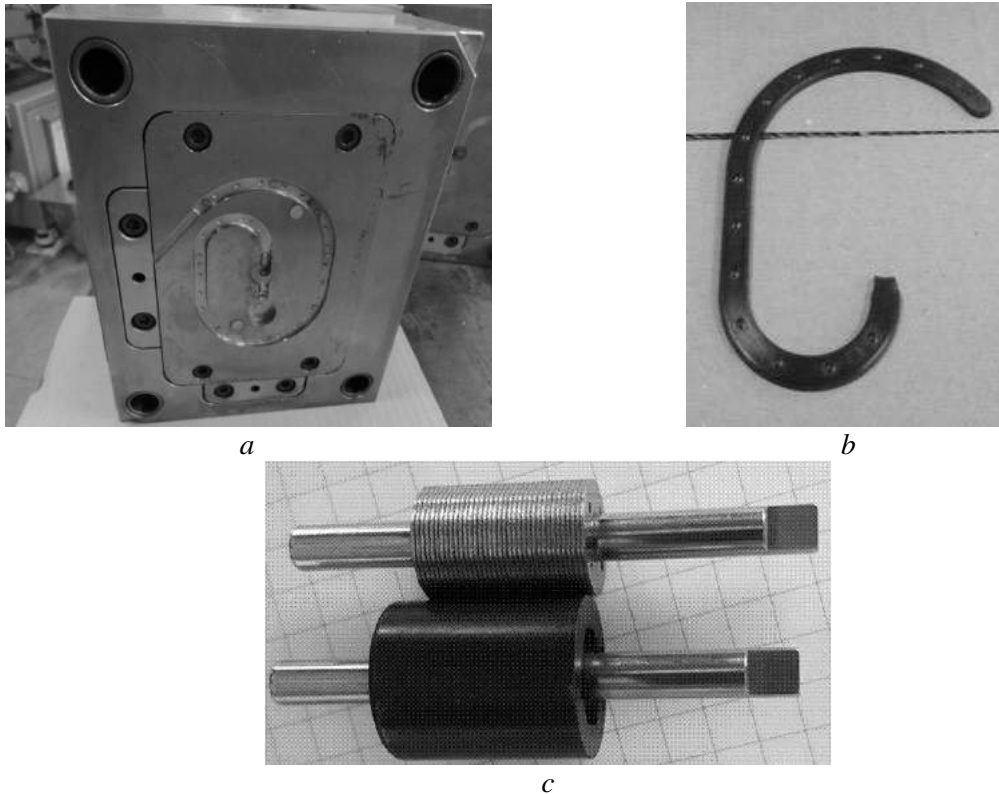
The spiral flow testing mould (a), spiral flow length (b) and injection moulded rotor on a steel shaft (c)
